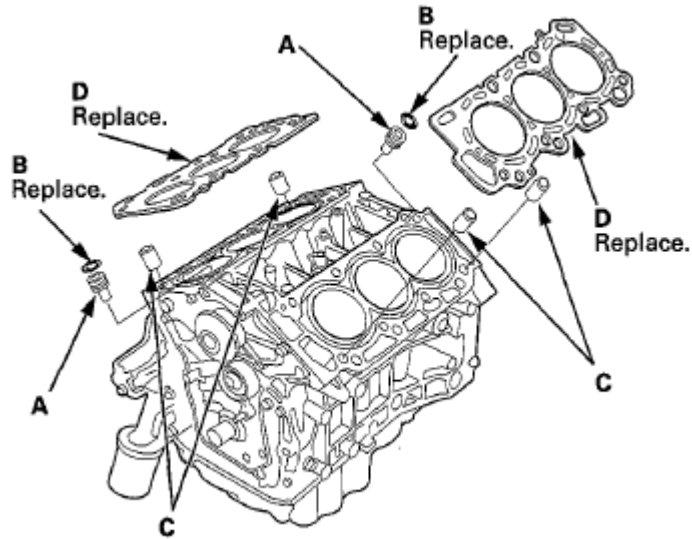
Identifying Dowel Pins & Cylinder Head Gaskets With O-Ring
